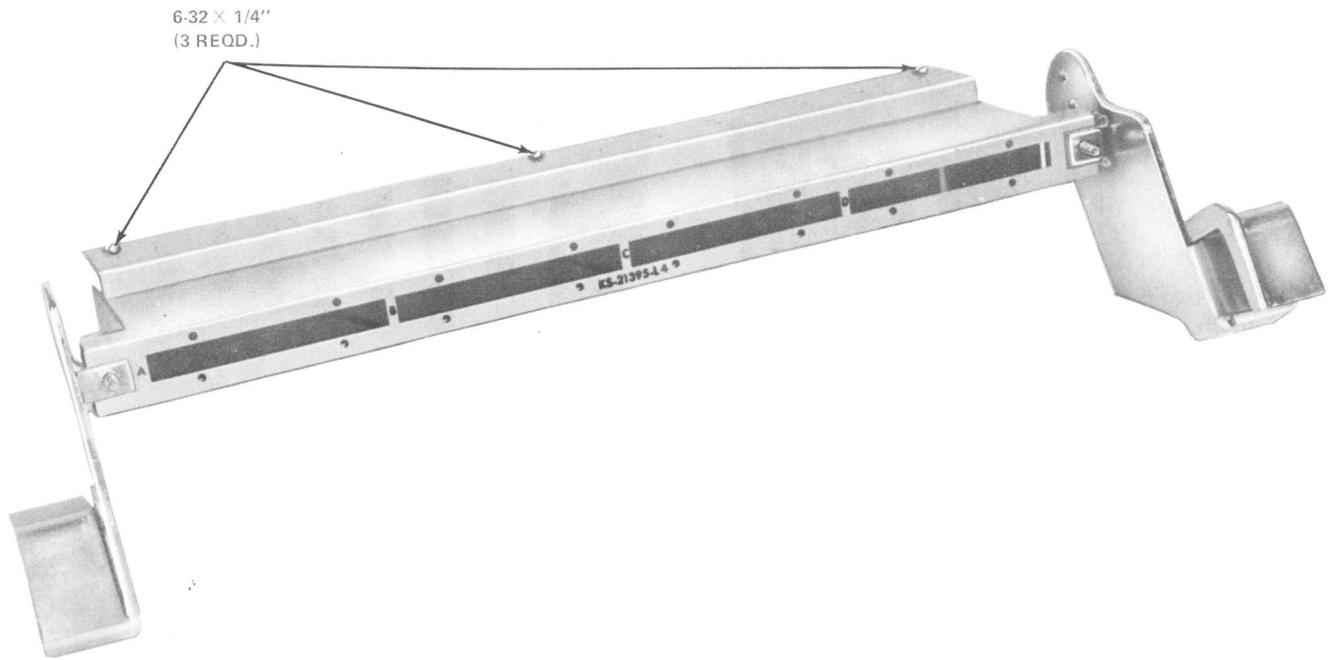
KS-21395-L4; ED-6C110-10, G64 Test/Talk Panel for Guard Rail Mounting
